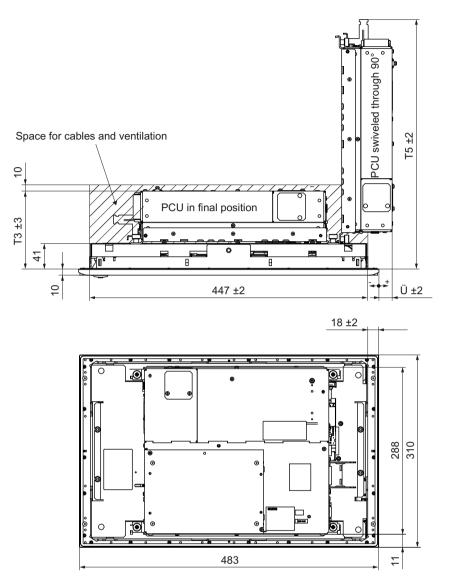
Dimension drawing for attaching the PCU to the OP015 operator panel front
